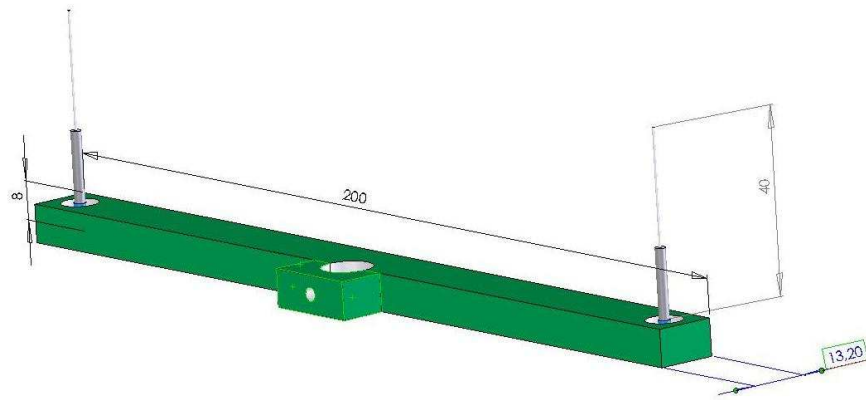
Mechanical size of mounting structure for two m-NLP probes. All dimensions are in mm.
